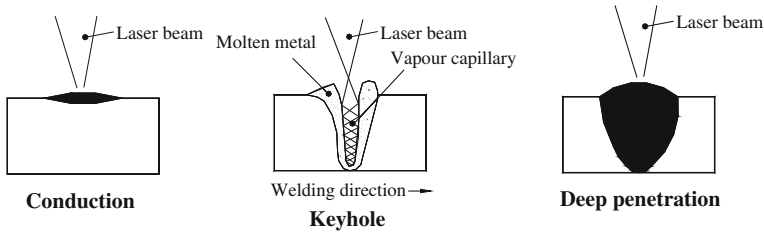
Weld geometry in different laser welding modes [4]
